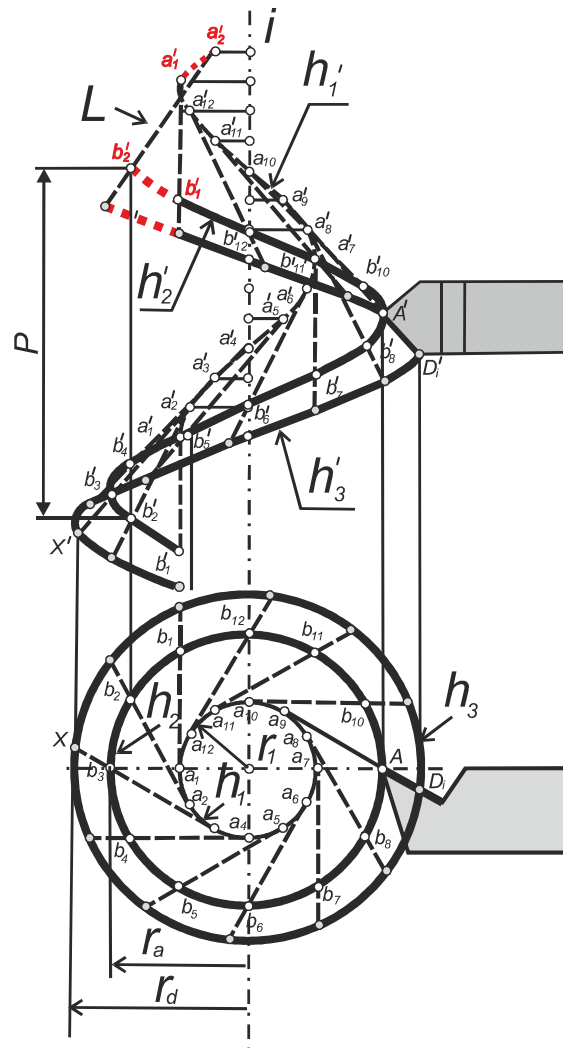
Scheme of execution of a convolute helicoid using a lathe cutter.
